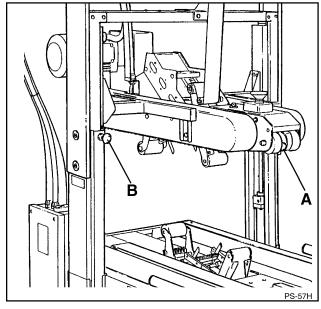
Latching Knob, Upper Taping Head Frame
